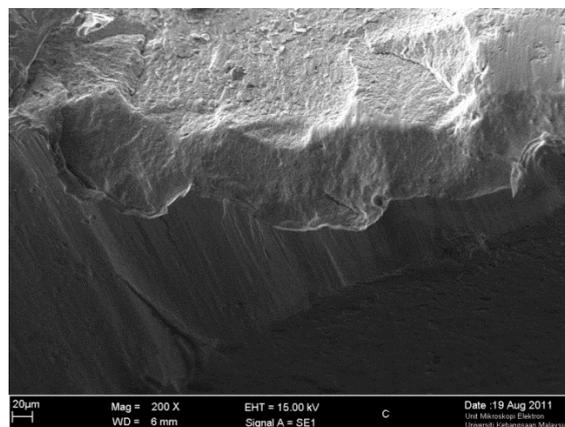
Major failure mode during end milling of Inconel 718 due to interrupted cutting force
